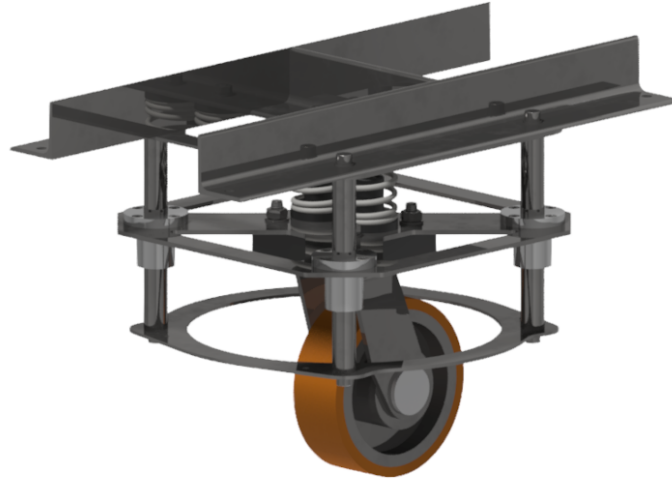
Finalised CAD Model of the AGV Castor Unit
